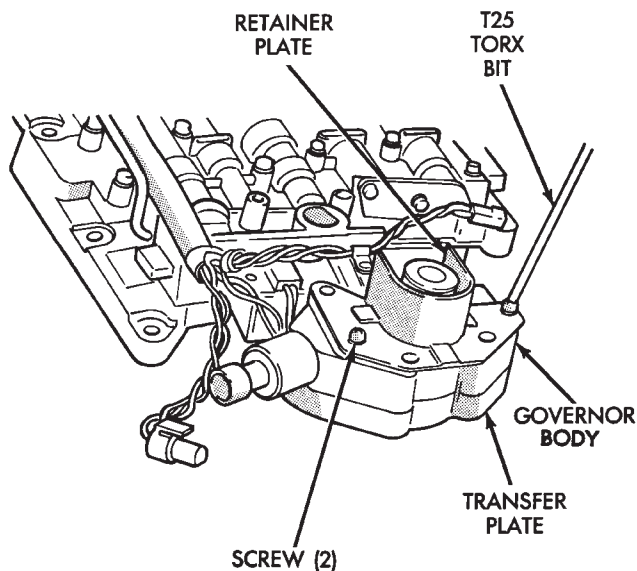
Governor Body And Retainer Plate Attaching Screw Removal/Installation
